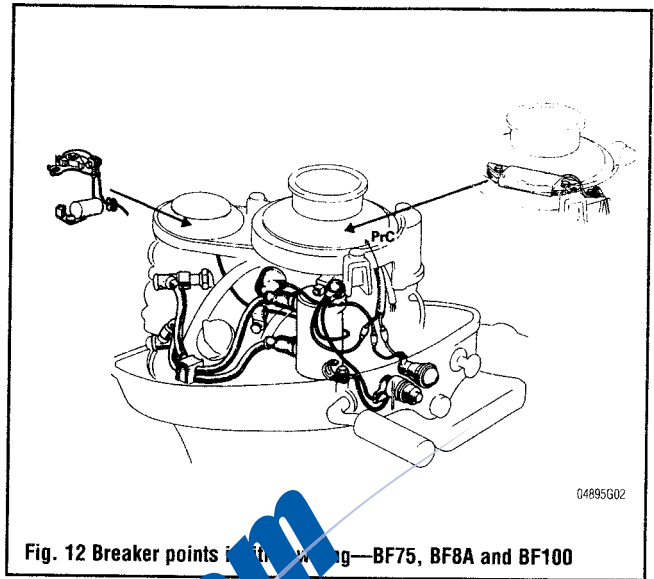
Breaker points in exploded view—BF75, BF8A and BF100
